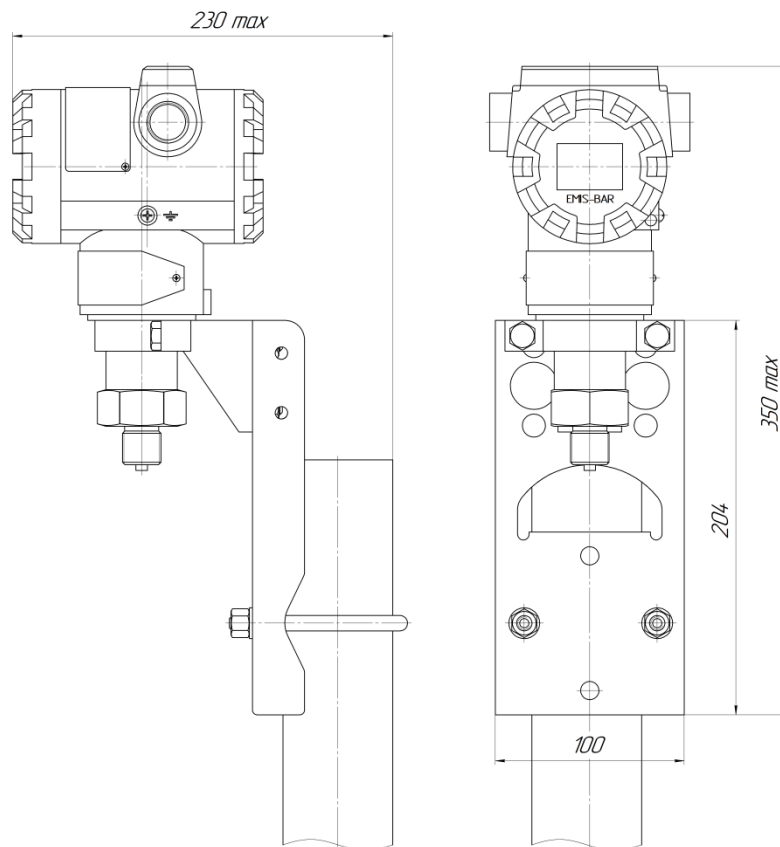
Horizontal bracket installation of in-line mount transmitter
